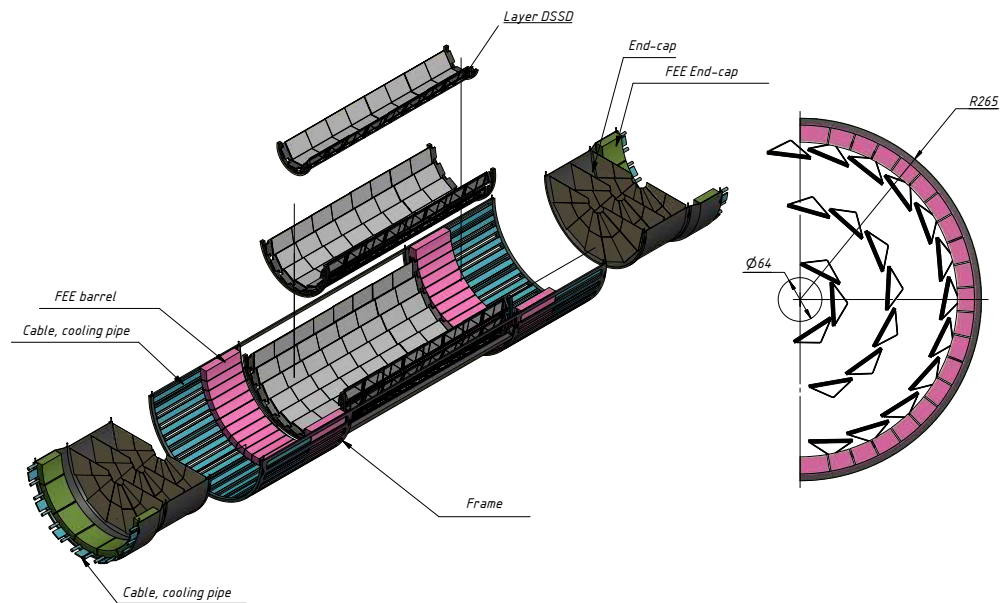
Sketch of the assembly of the end-cap and the barrel parts of VD.
